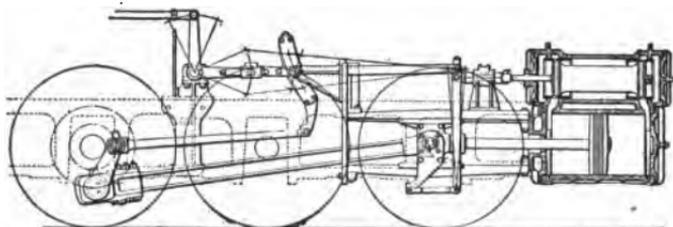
Piston Valve Actuated by Walschaert Gear.
